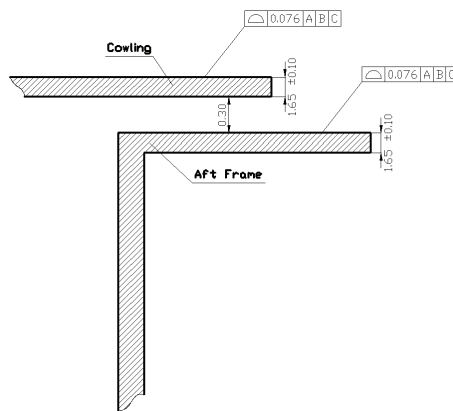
Tolerances applied to the coupling surfaces of the After Frame and the After Cowling
